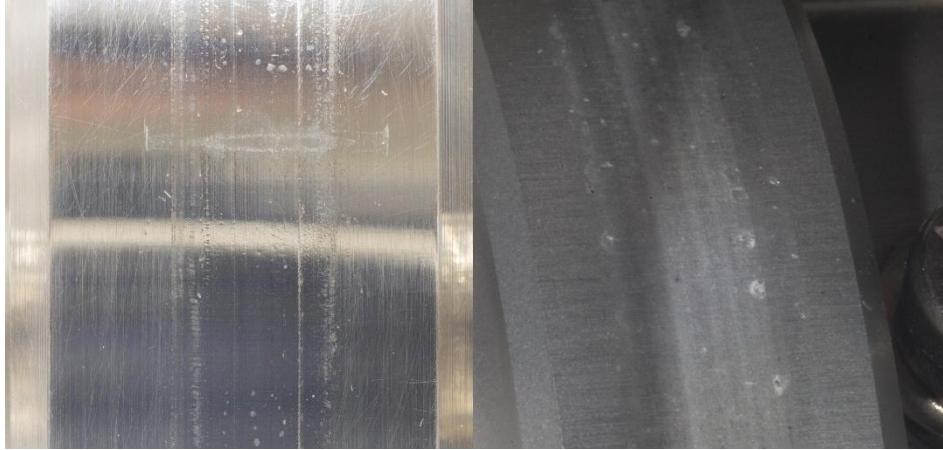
Examples of wear mechanisms that were observed during the bearing lifetime tests. *Left*: a combination of adhesive and abrasive wear on an aluminium roller. *Right*: pitting on the surface of a Surlon coated aluminium roller caused by surface fatigue.
